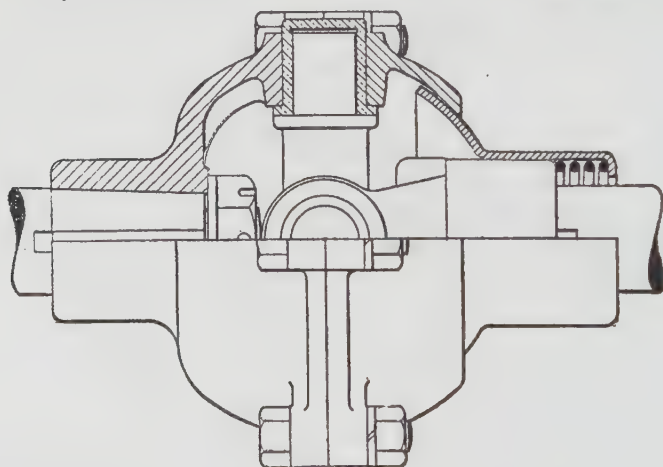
ENCLOSED UNIVERSAL JOINT.
